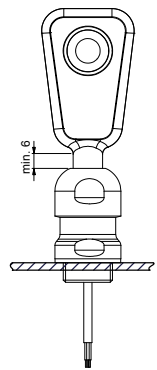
Mounting of pms sensor with sensor screw connection BF-pms/A1
